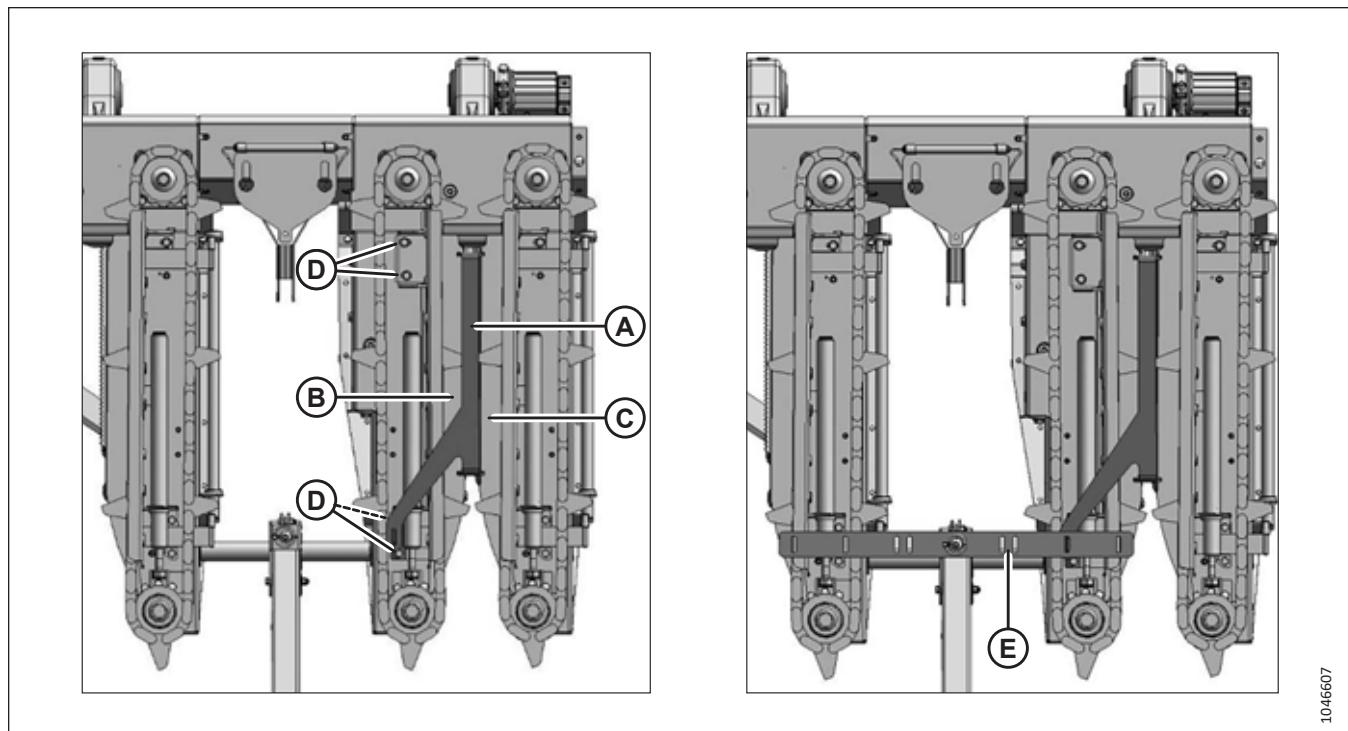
Row Unit with Snapping Plate Tool and Snout Seating Tool
